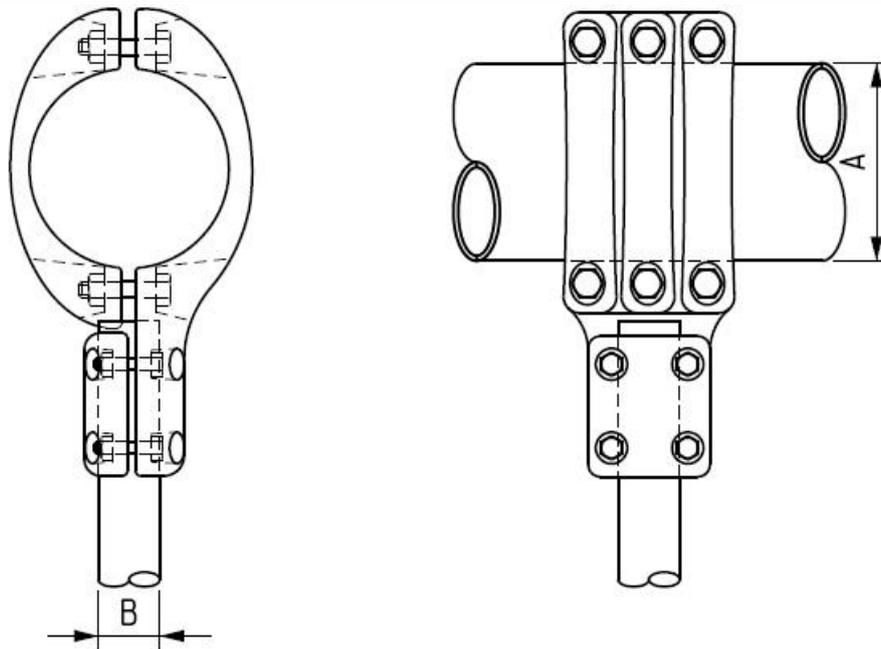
ECC-IL-ST: Coupling Clamp – Inline – Stem – Equipment Mounted (D-DT-6037)
